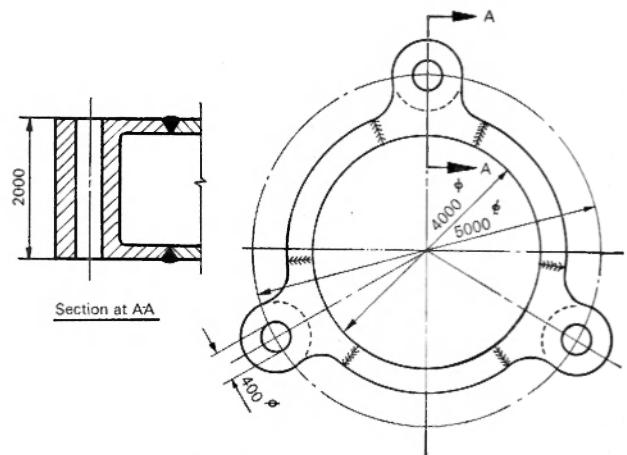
Fabricated Rotary Table for Bucket Wheel Reclaimer of 2000 T/S hours.
